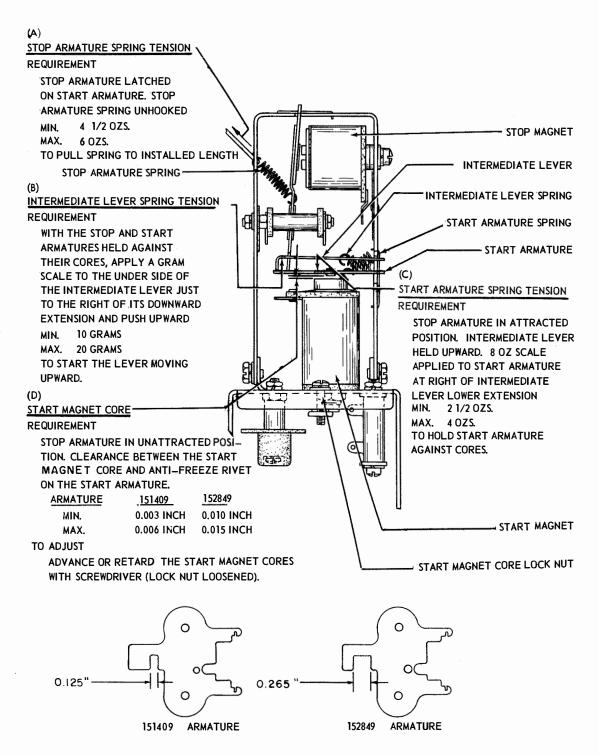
MOTOR CONTROL ASSEMBLY
